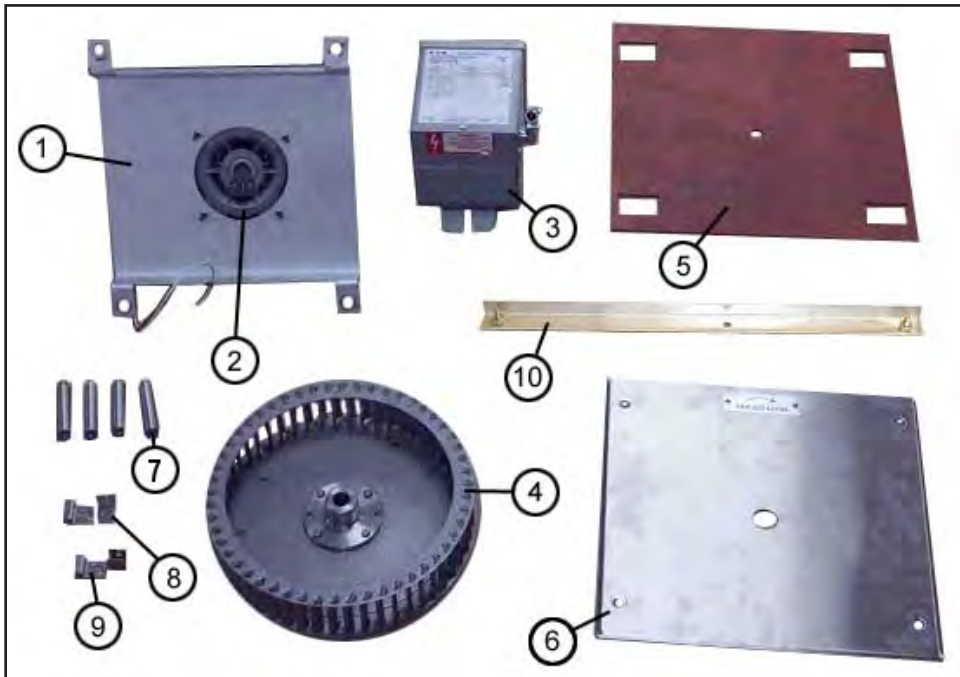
MOTOR / TRANSFORMER ASSEMBLY
